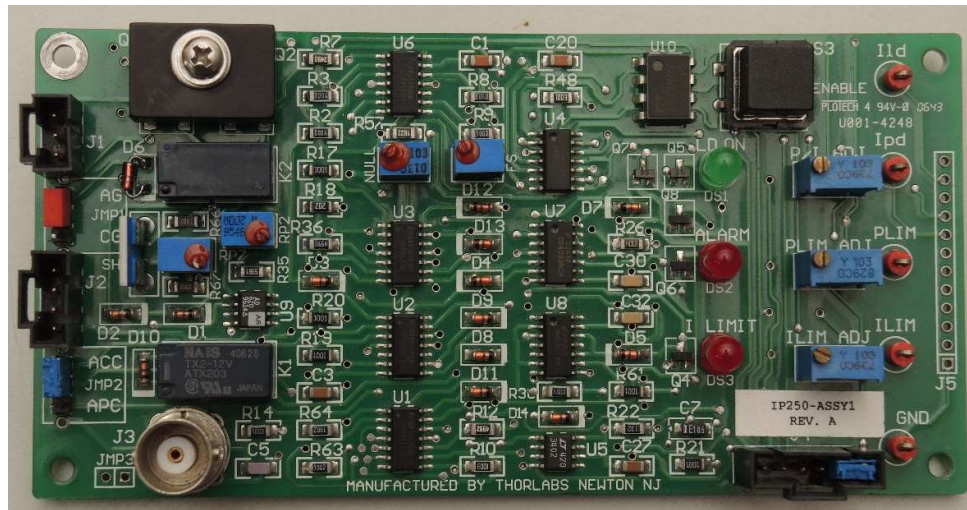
Thorlabs IP250-BV laser diode driver, top side, after modification (added components JMP1, D6 and K2).
